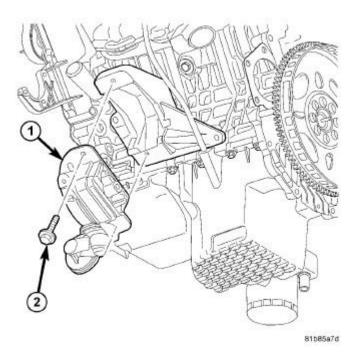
Left Engine Mount & Bolts Courtesy of CHRYSLER LLC
